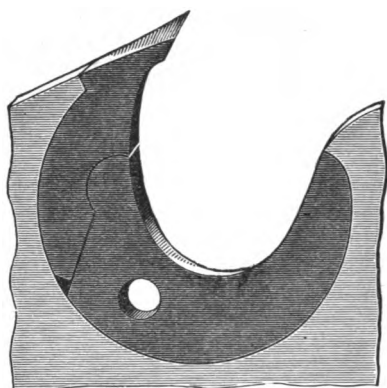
ACTUAL SIZE NO. 5 TOOTH.
